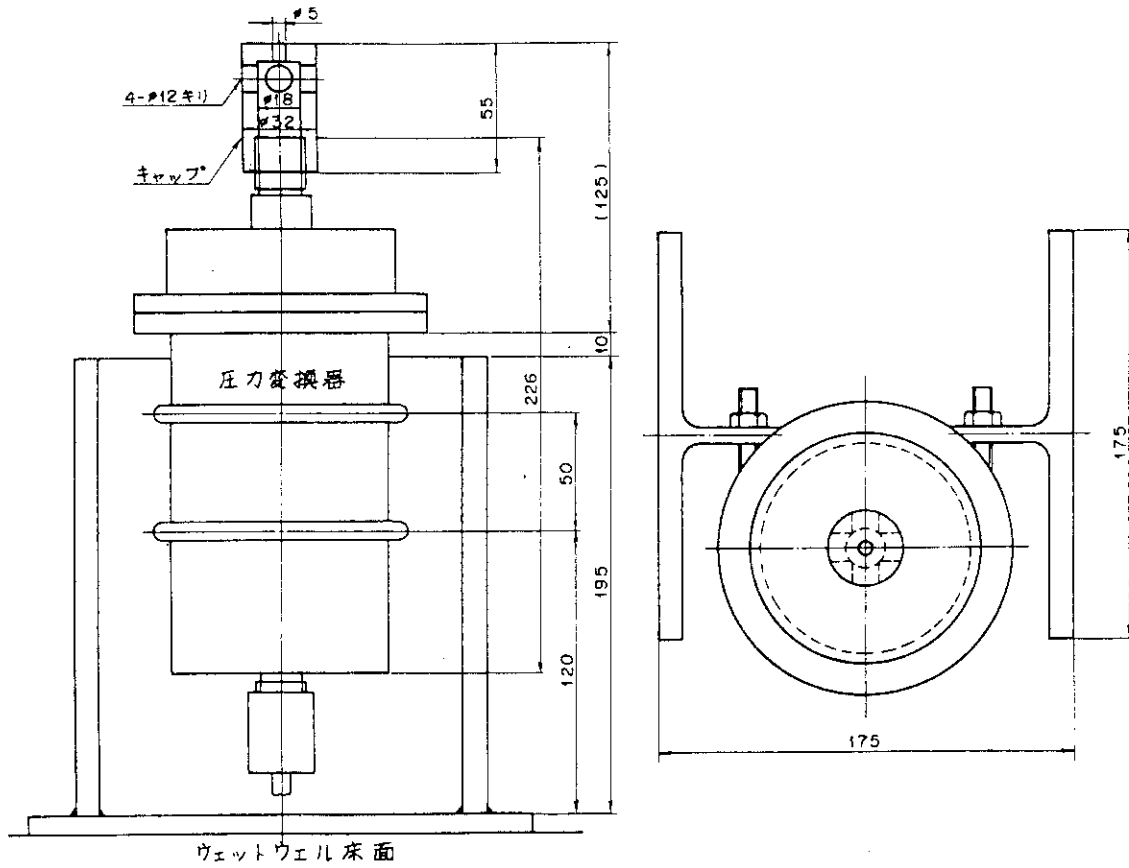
Schematic of installation of cavity type pressure transducers on wetwell bottom floor (as of after modifications)
